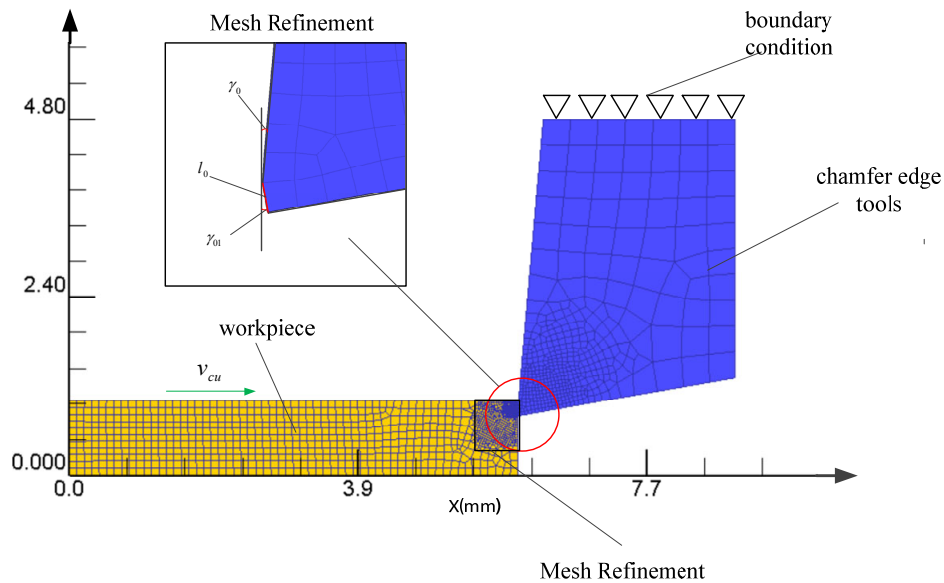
Finite Element Tool and Workpiece Constraint Setup
